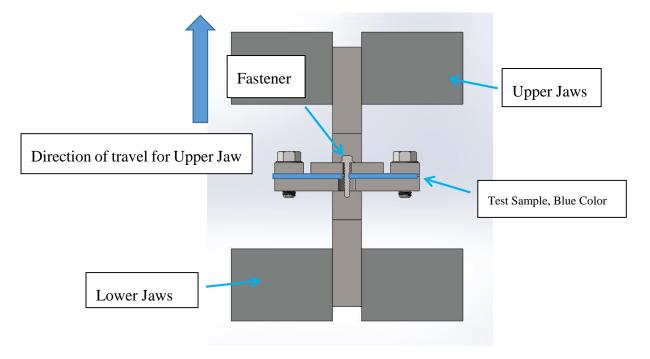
Schematic of Tensile Test Lower and Upper Jaws
